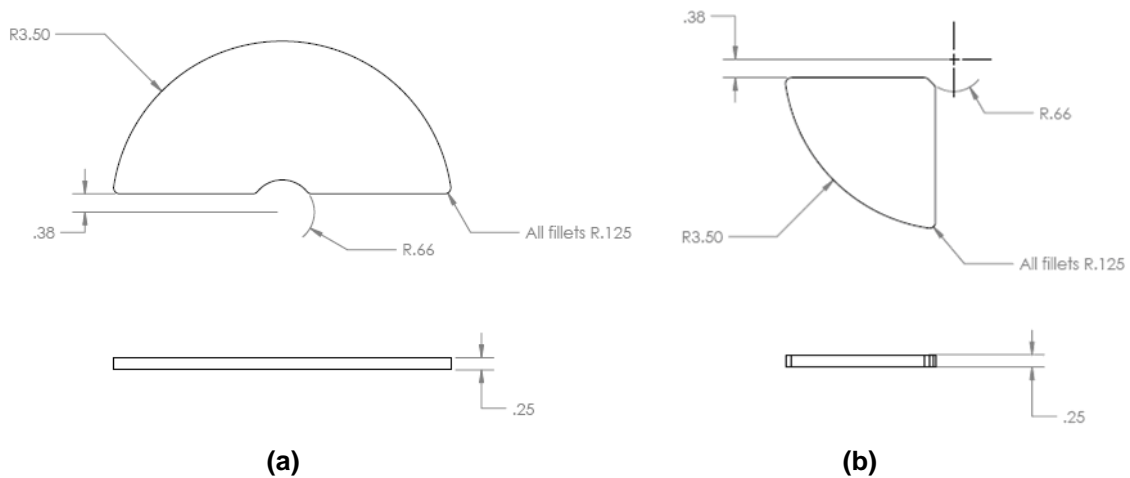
Engineering drawing for (a) half showerhead ceramic layer, and (b) quarter showerhead ceramic layer
